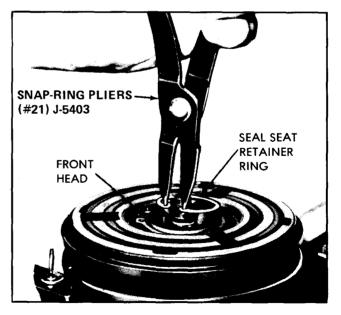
Removing or Installing Shaft Seal Seat Retaining Ring
